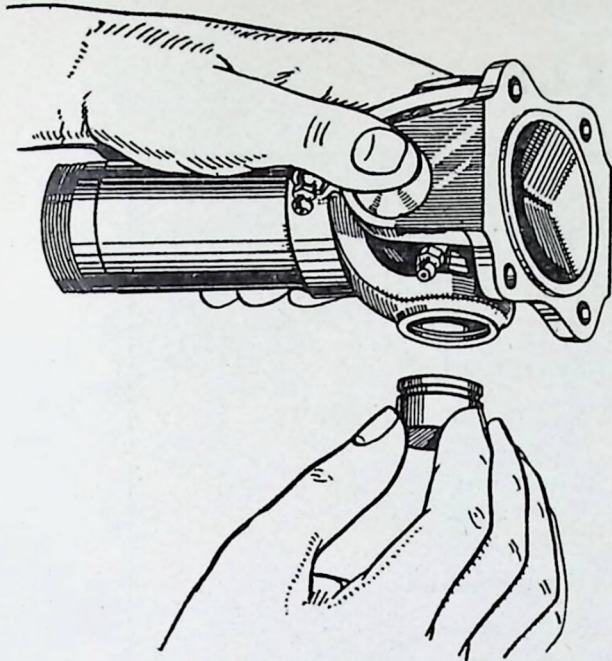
Hold the bearing in a vertical position when removing and replacing so that the needle bearings are not displaced.
